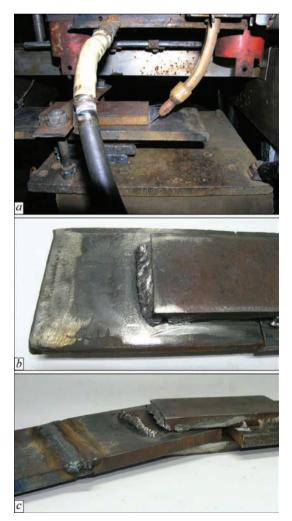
Examples of welded joints of specimens with different parameters of assembly and welding
